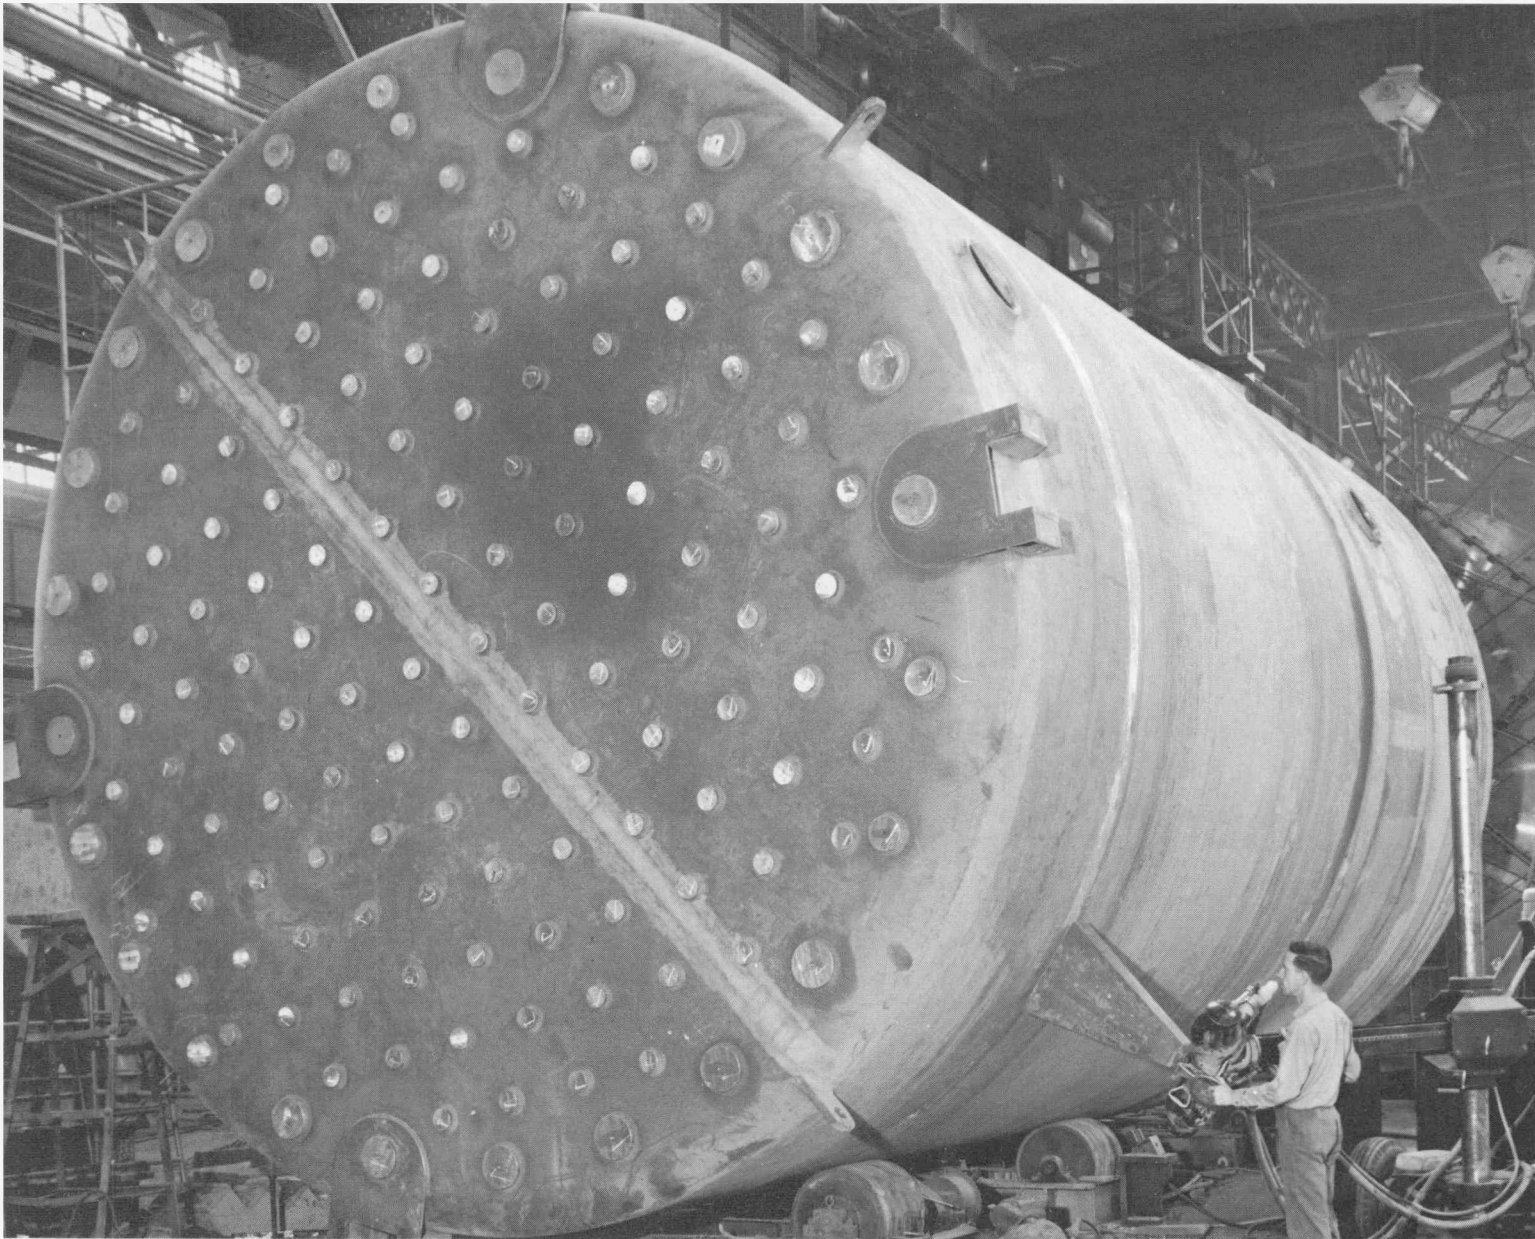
Reactor Vessel of Type 304 SS (View during radiographing of final weld joints, showing support pads and keyways on the bottom of the vessel.)
